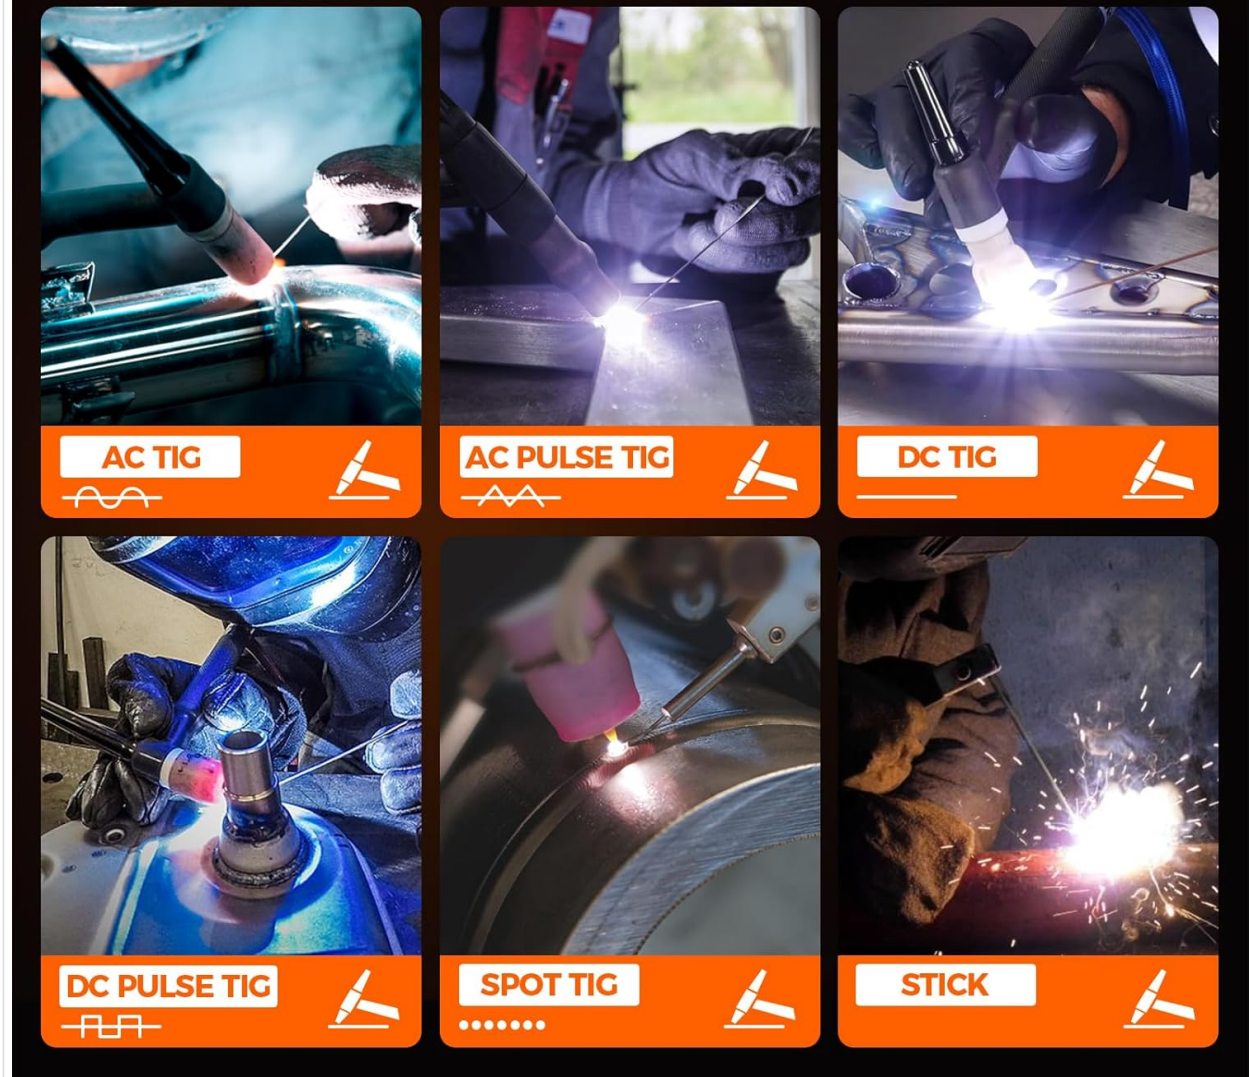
Visual representation of the six welding modes available on the TIG200P.
